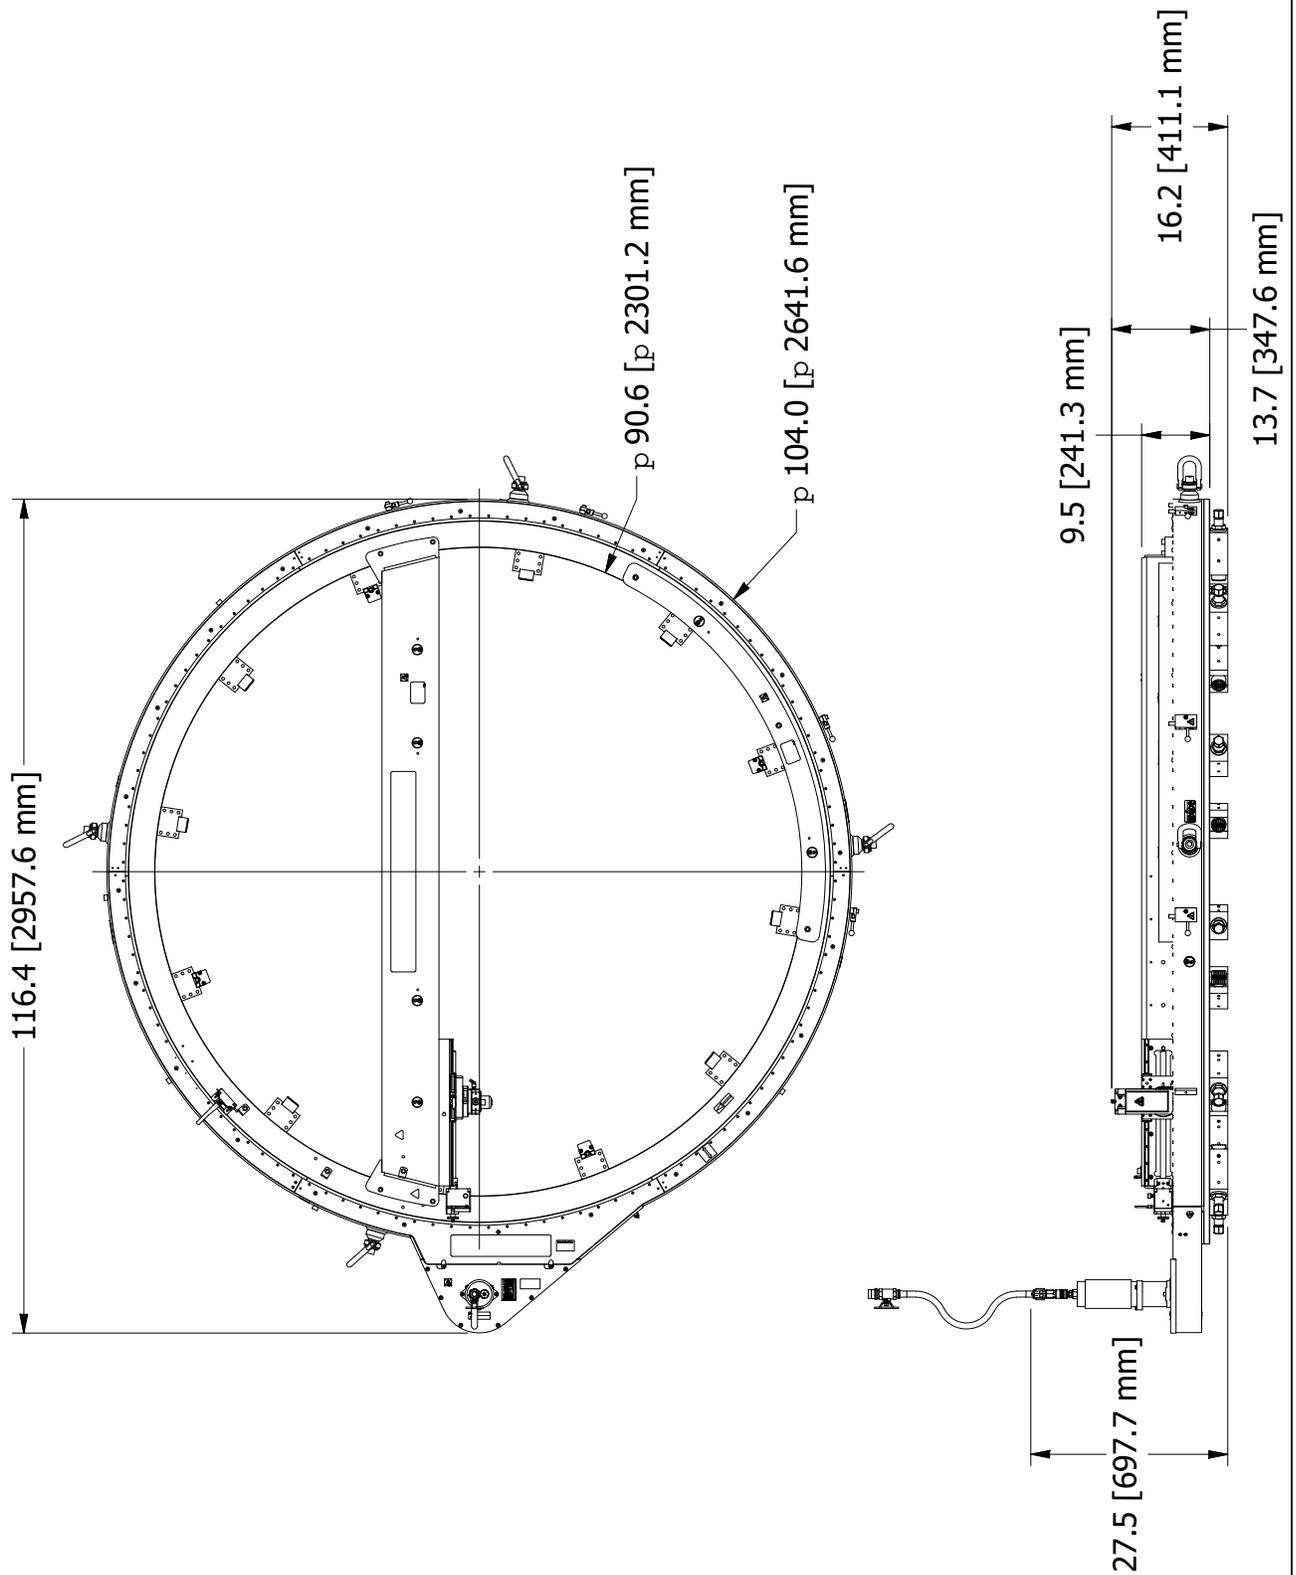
ODF90 SPEED FACER DIMENSIONS (REF. 94780)
